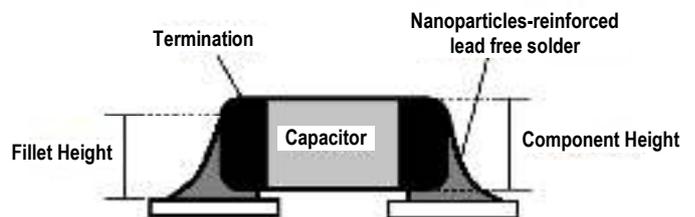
The measurement illustration of the fillet height for the 01005 capacitor with solder joint.
